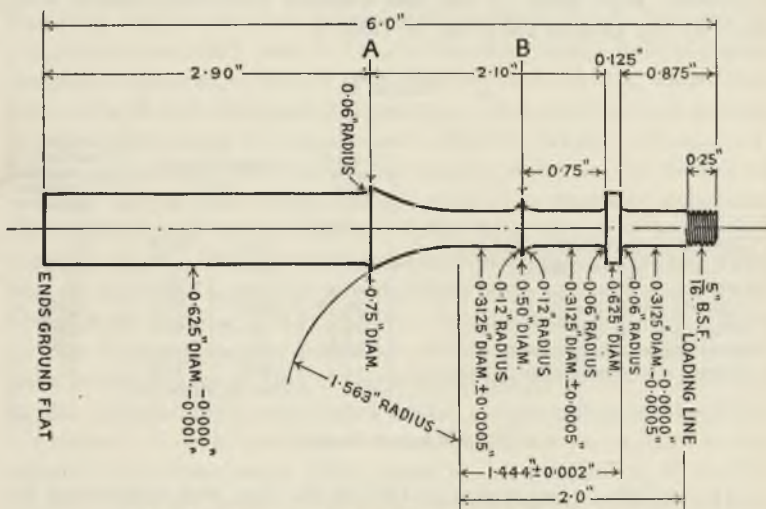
Corrosion-Fatigue Test-Piece (Wöhler Type.)
